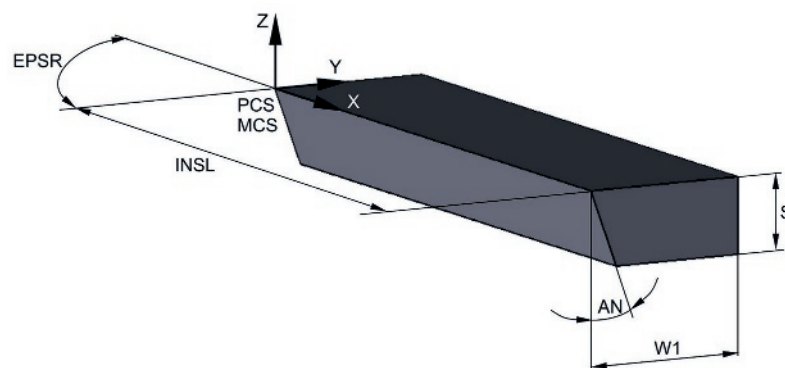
Basic geometry of a reaming insert with one cutting edge and double plug chamfer
